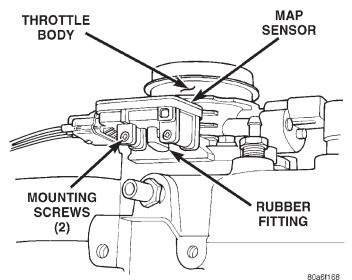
Rubber L-Shaped Fitting—MAP Sensor-to-Throttle Body
